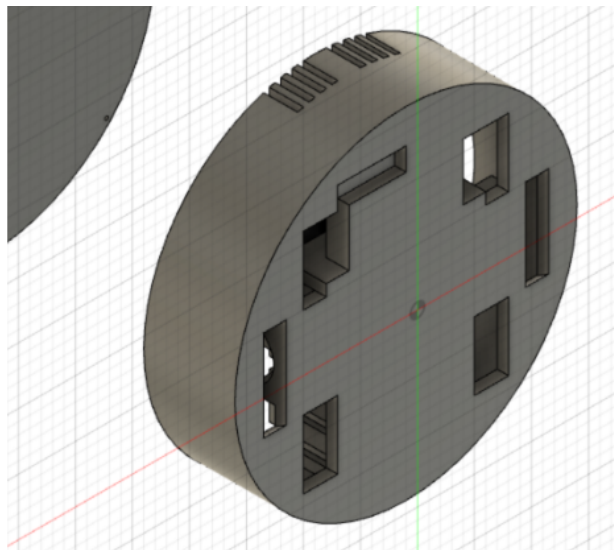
Bottom view, which shows the holes for sensors/wheels etc.
